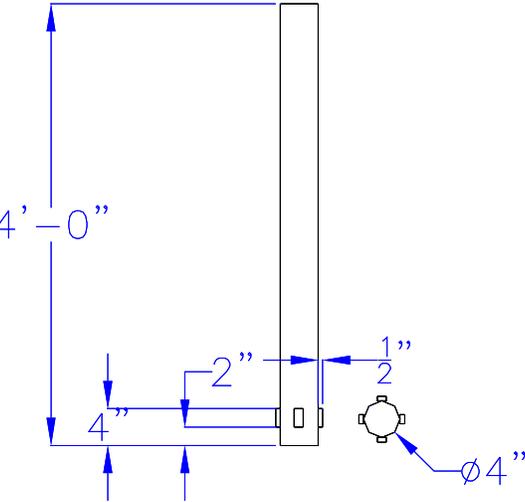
Expedient Anchor Plate Steel Anchor Post
